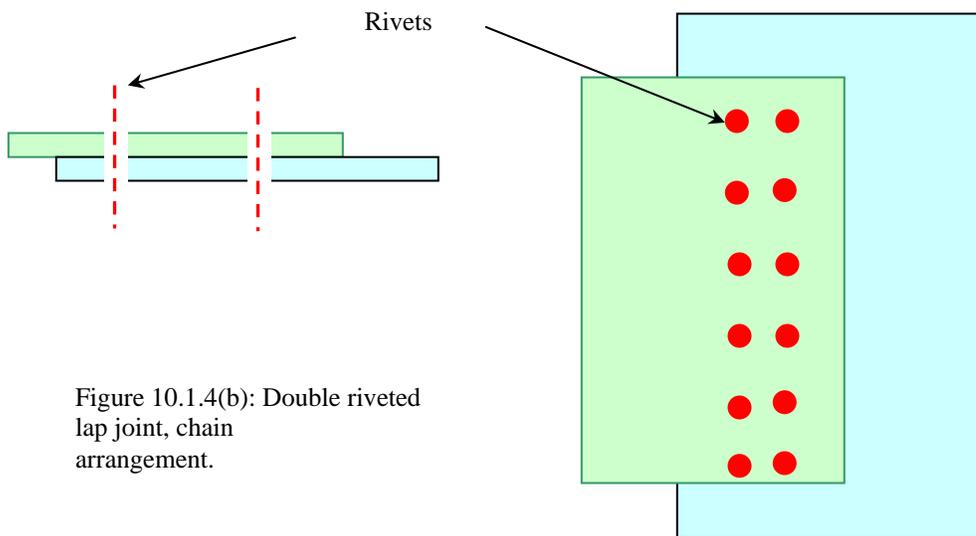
(b): Double riveted lap joint, chain arrangement.
